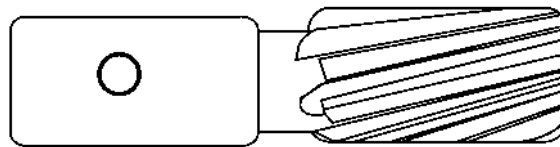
, A spiral fluted R.H. cut stub screw machine reamer.
